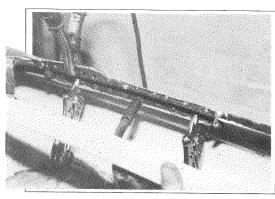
Carrying on with the rebuild, the wing top was itself plug welded to the forward spur of the rear deck: access being obtained by the previous removal of the strengthener panel shown in figure 43, after which the strengthener itself can be simply welded back in place.
